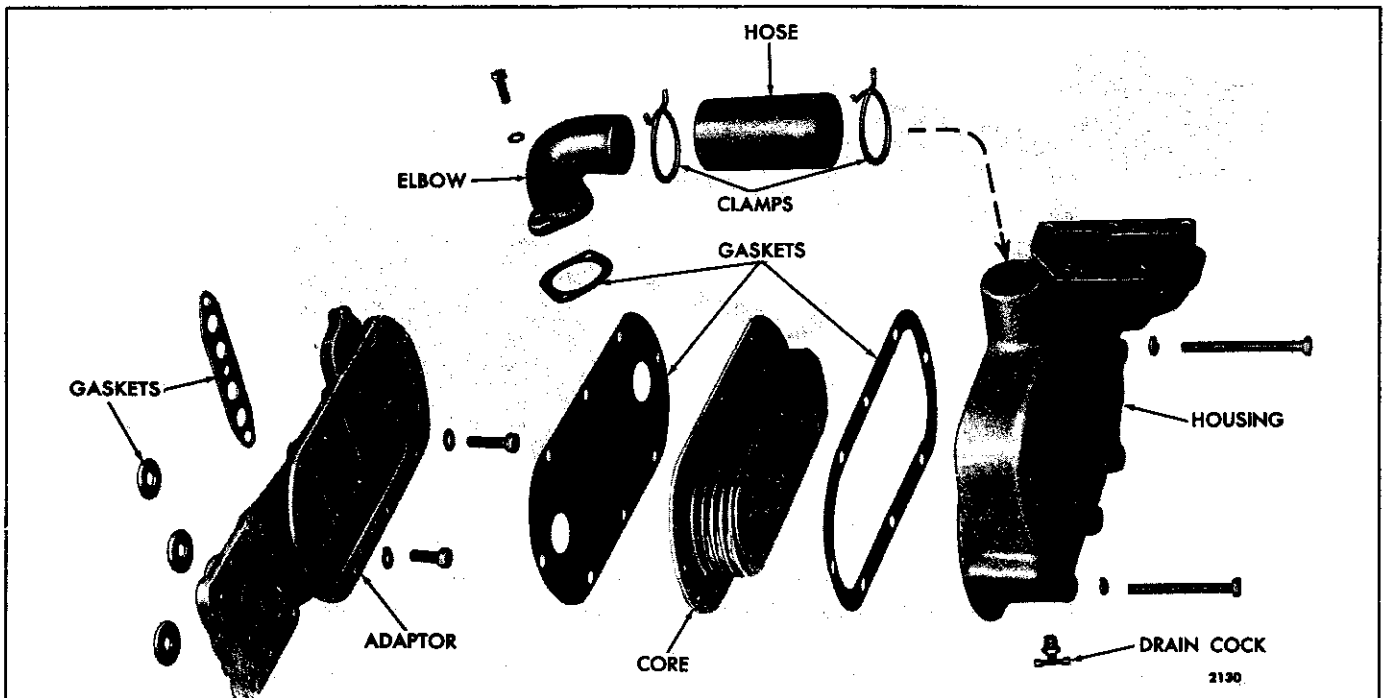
Oil Cooler Details and Relative Location of Parts (In-Line Engine)
